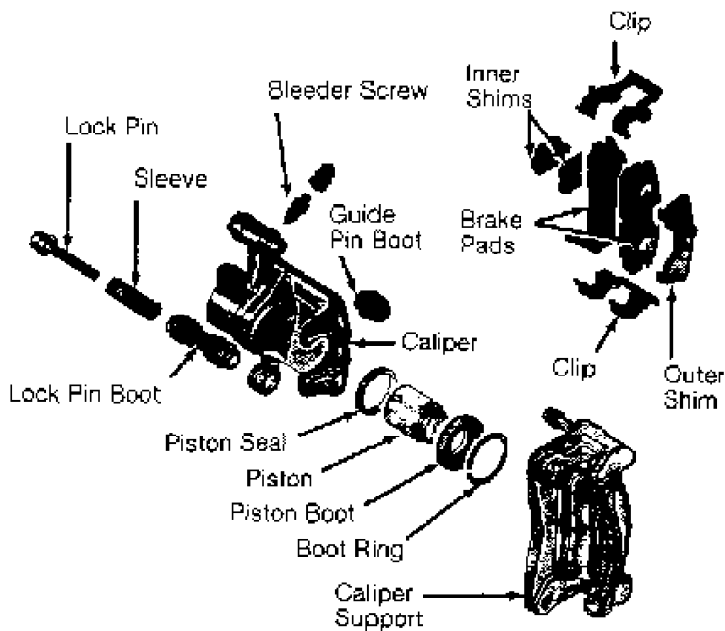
Exploded View Of Rear Disc Brake Caliper Assembly
